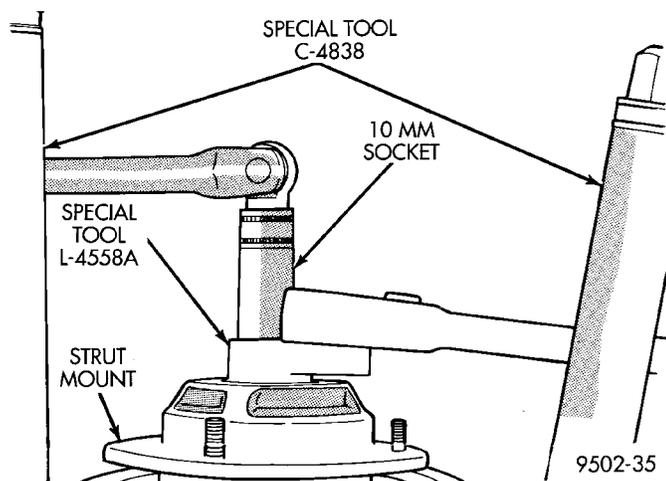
Strut Shaft Retaining Nut Removal Tools
